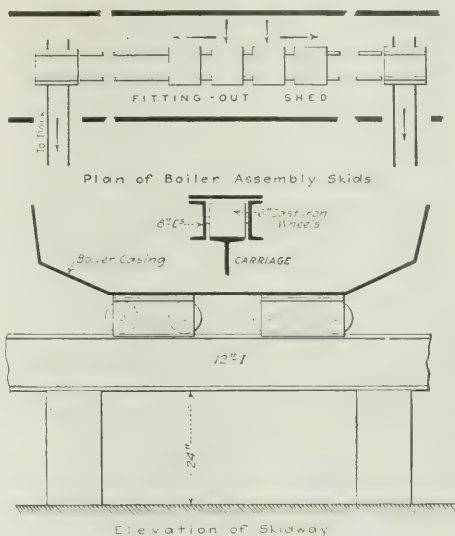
FORD CONVEYOR-ASSEMBLY SYSTEM IN BOILER SKIDWAY
